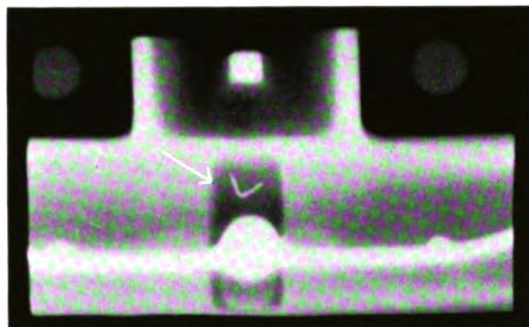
Inclusion of a Piece of Wire in Magnesium Casting.
